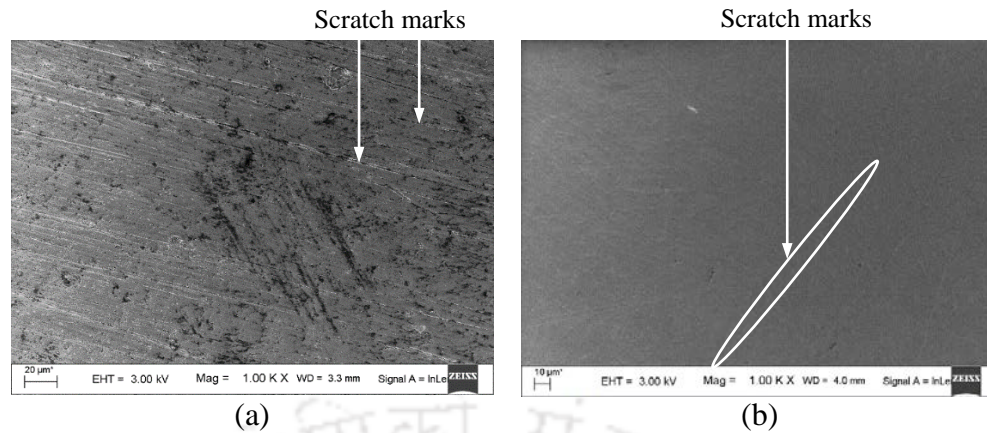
FESEM images of Ti alloy workpiece surface (a) before and (b) after polishing with MR fluid of type – I
